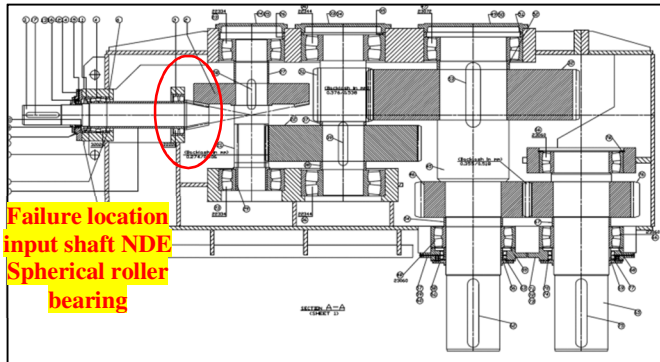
GA drawing of NBM stand 1 Gearbox Fig.3 Failed Bearing of Stand no 1 gearbox.
